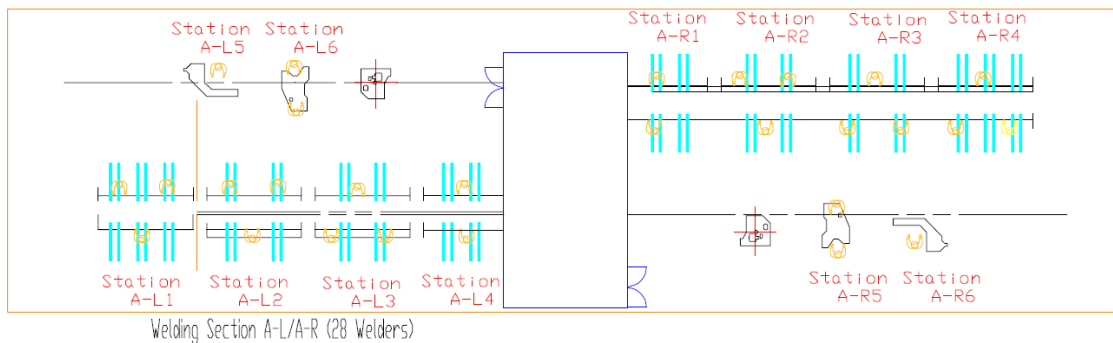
Welding Section A-L/A-R, Sides Assembly Line
